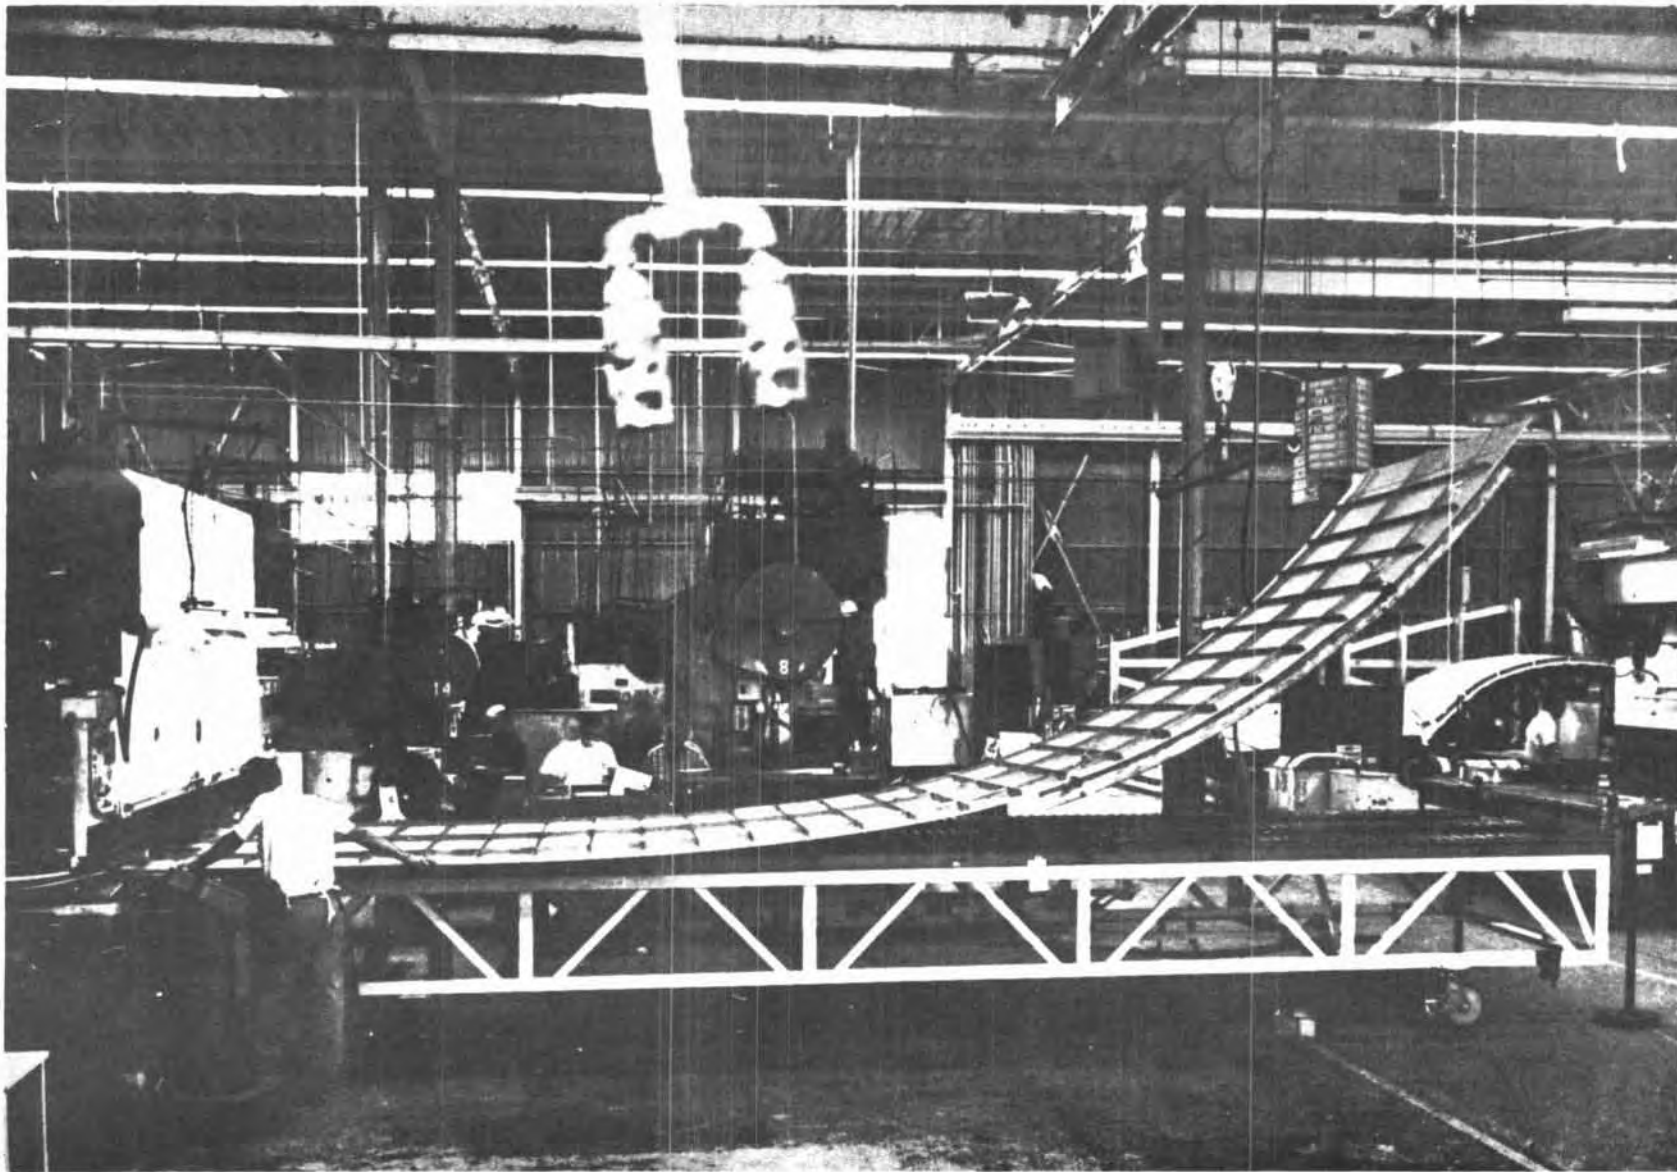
BULKHEAD DOLLAR WELDER
